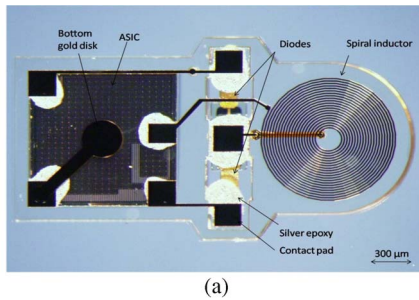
Fabricated SU-8 socket platform with ASIC and diode sockets, contact pads on the bottom floor of the socket, and embedded spiral inductor.
